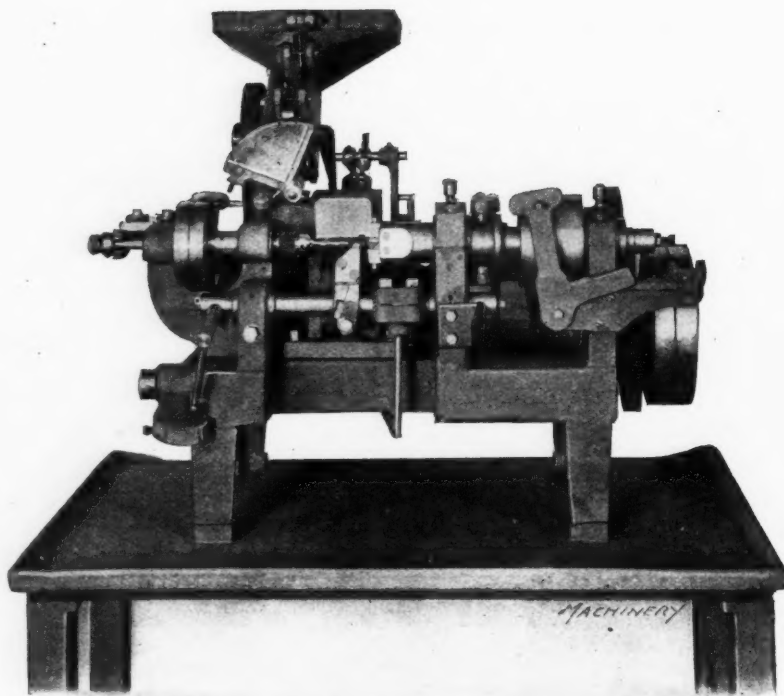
Townsend Screw Machine tooled up for Drilling and Turning Operations
